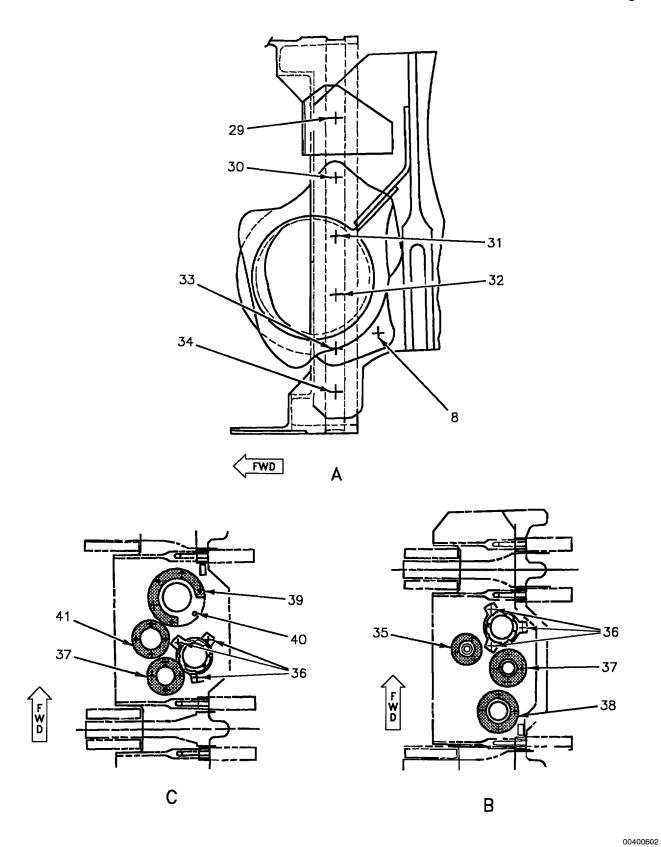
Inner Closure Rib Fasteners and Repair Fasteners (Sheet 2)
